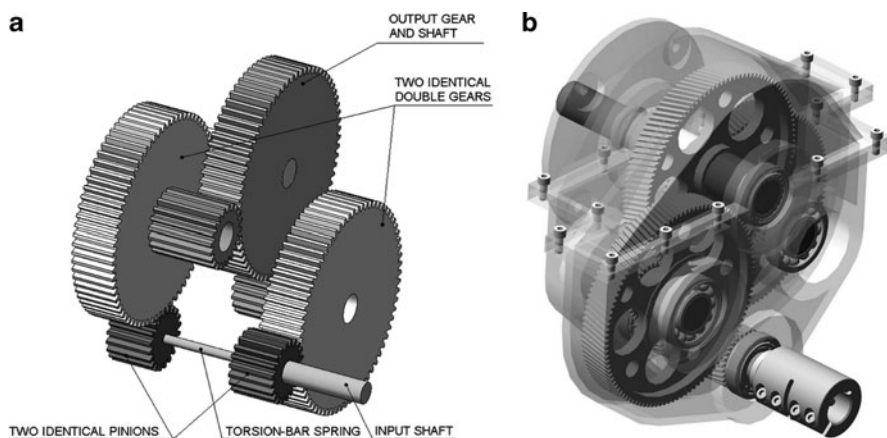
(a) Anti-backlash gear assembly, (b) prototype design of the backlash-free gearbox
